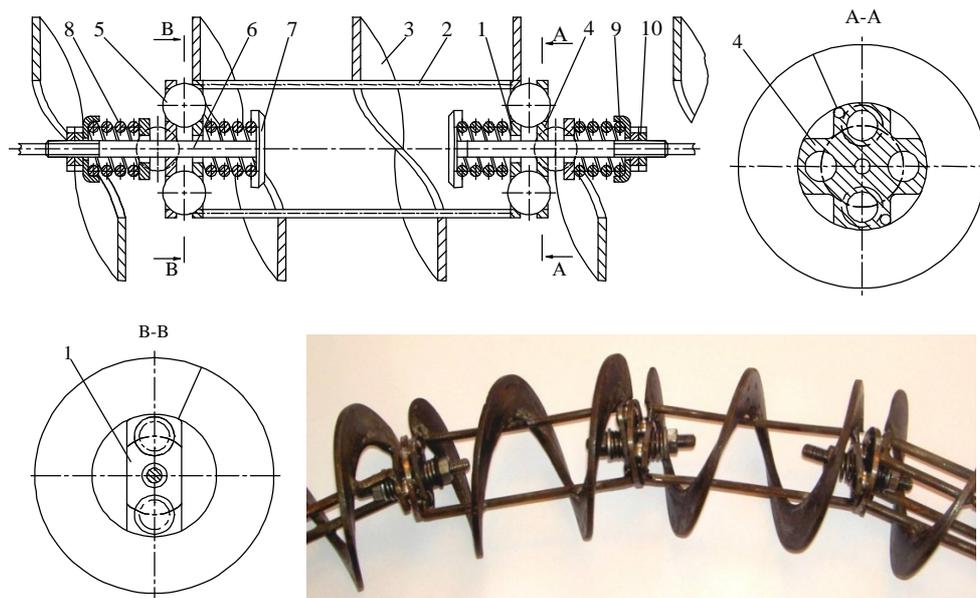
Construction arrangement and general view of a hinged tool of a screw conveyor
